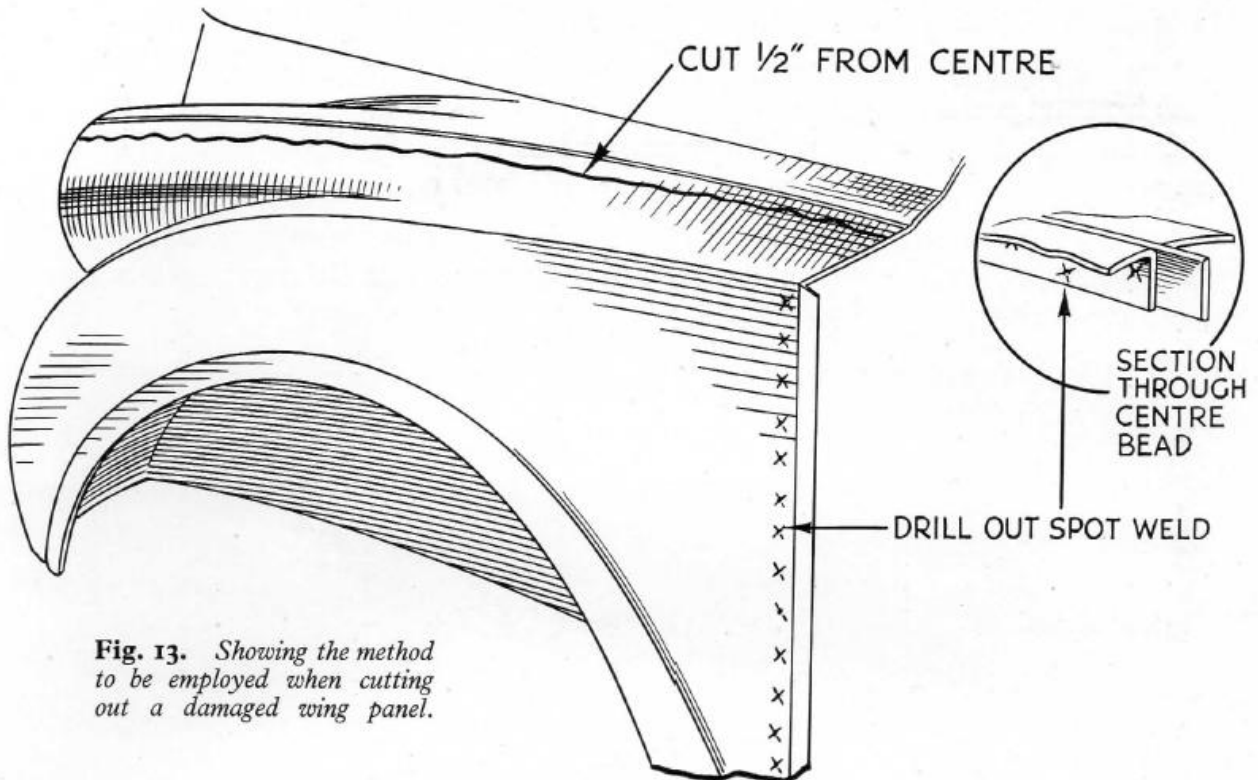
Showing the method to be employed when cutting out a damaged wing panel.
